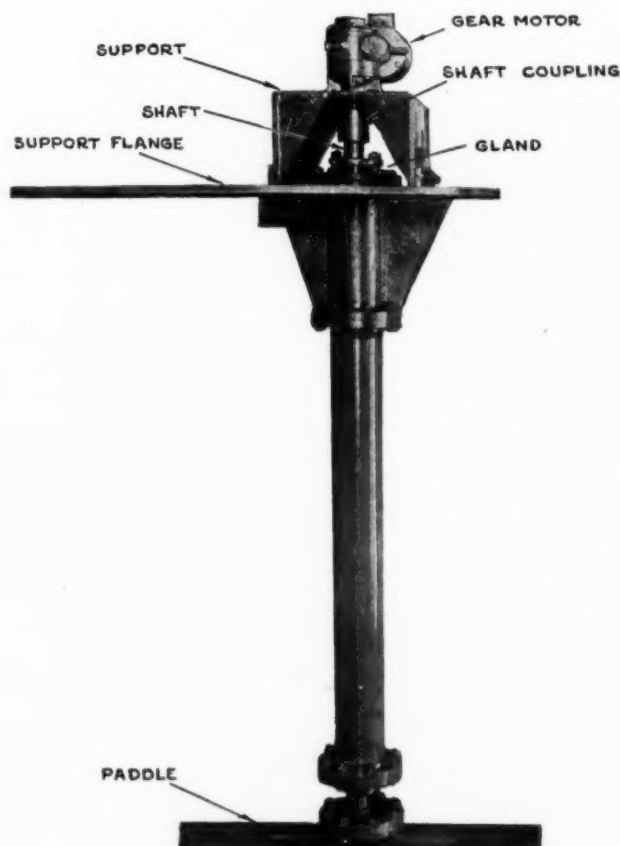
Stirring mechanism assembly consists of a slowly rotating paddle driven through a gear reducer by an electric motor
